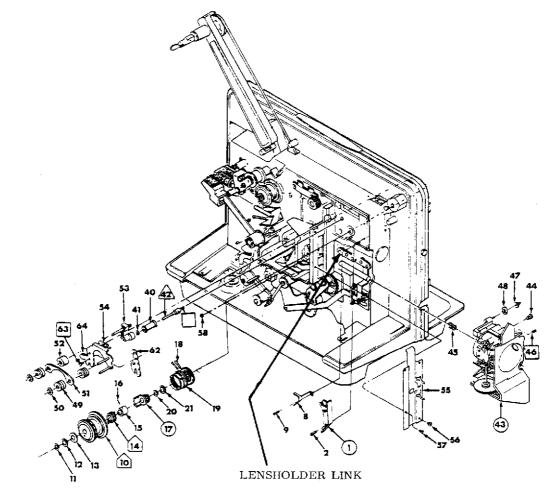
REMOVAL AND REASSEMBLY OF LENSHOLDER
